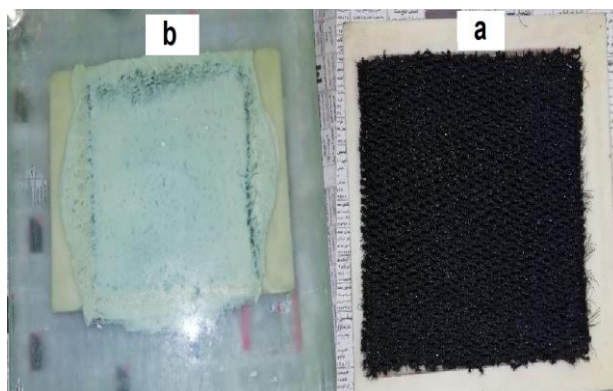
Molded samples a) Fabric placed in the mold b) The final stages of molding
